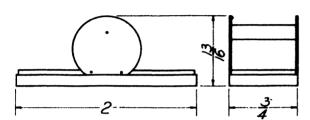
ASSEMBLY DRAWING OF DESK TRAY
